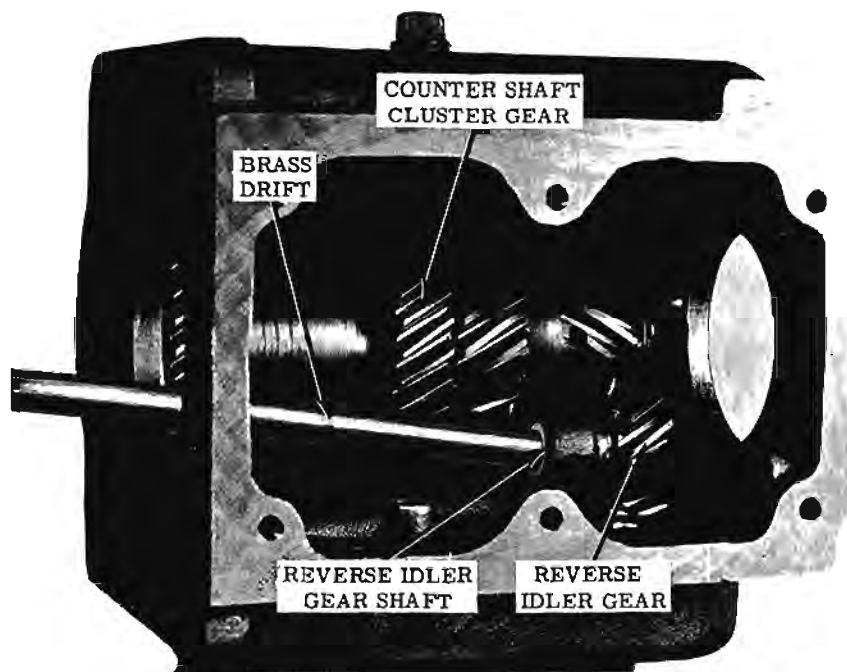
Reverse Idler and Cluster Gear Removal
